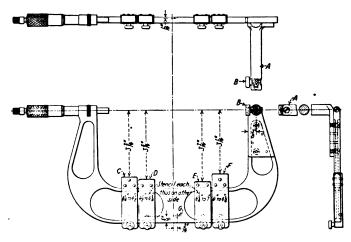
Micrometer Caliper with Special Attachment for Measuring Wheel Seats on Axles
